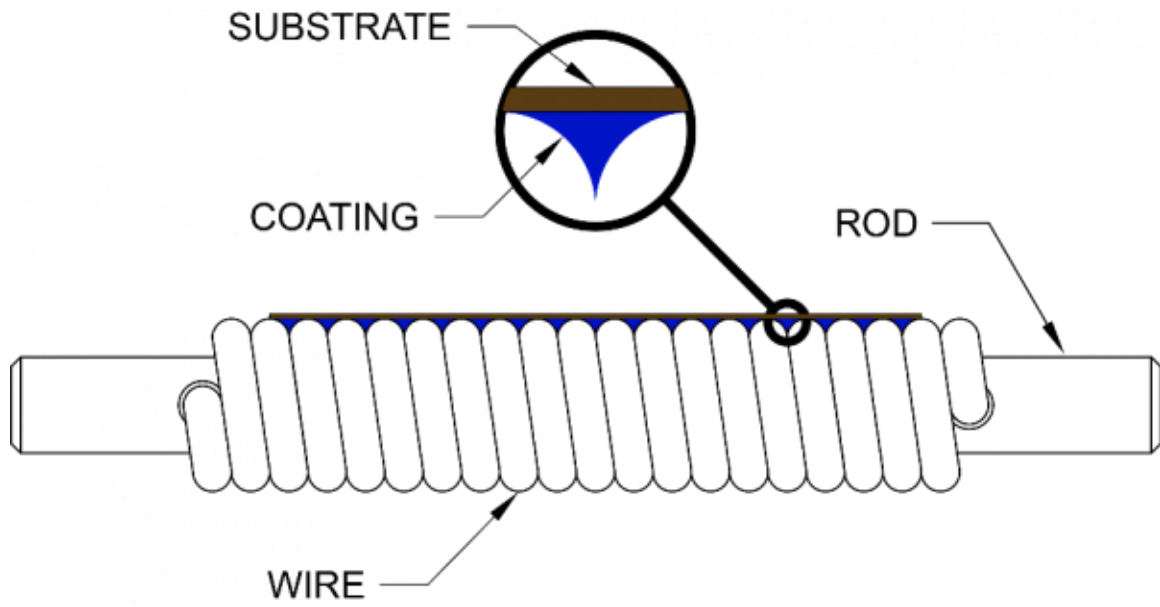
Meyer Rod Schematic Demonstrating How Wire Gauge Affects Film Thickness
